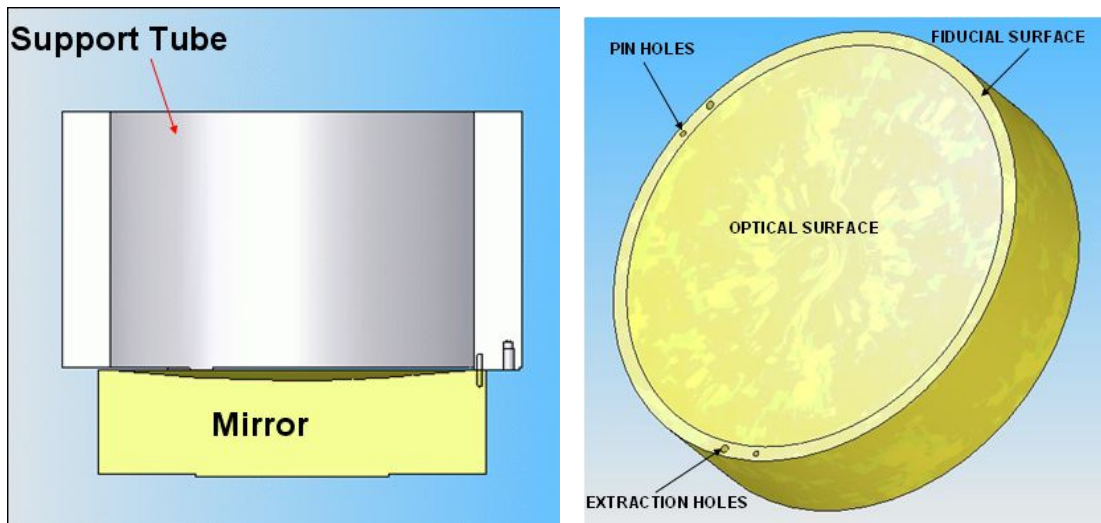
Assembly (left) showing mirror mounted to tube and mirror details (right)
